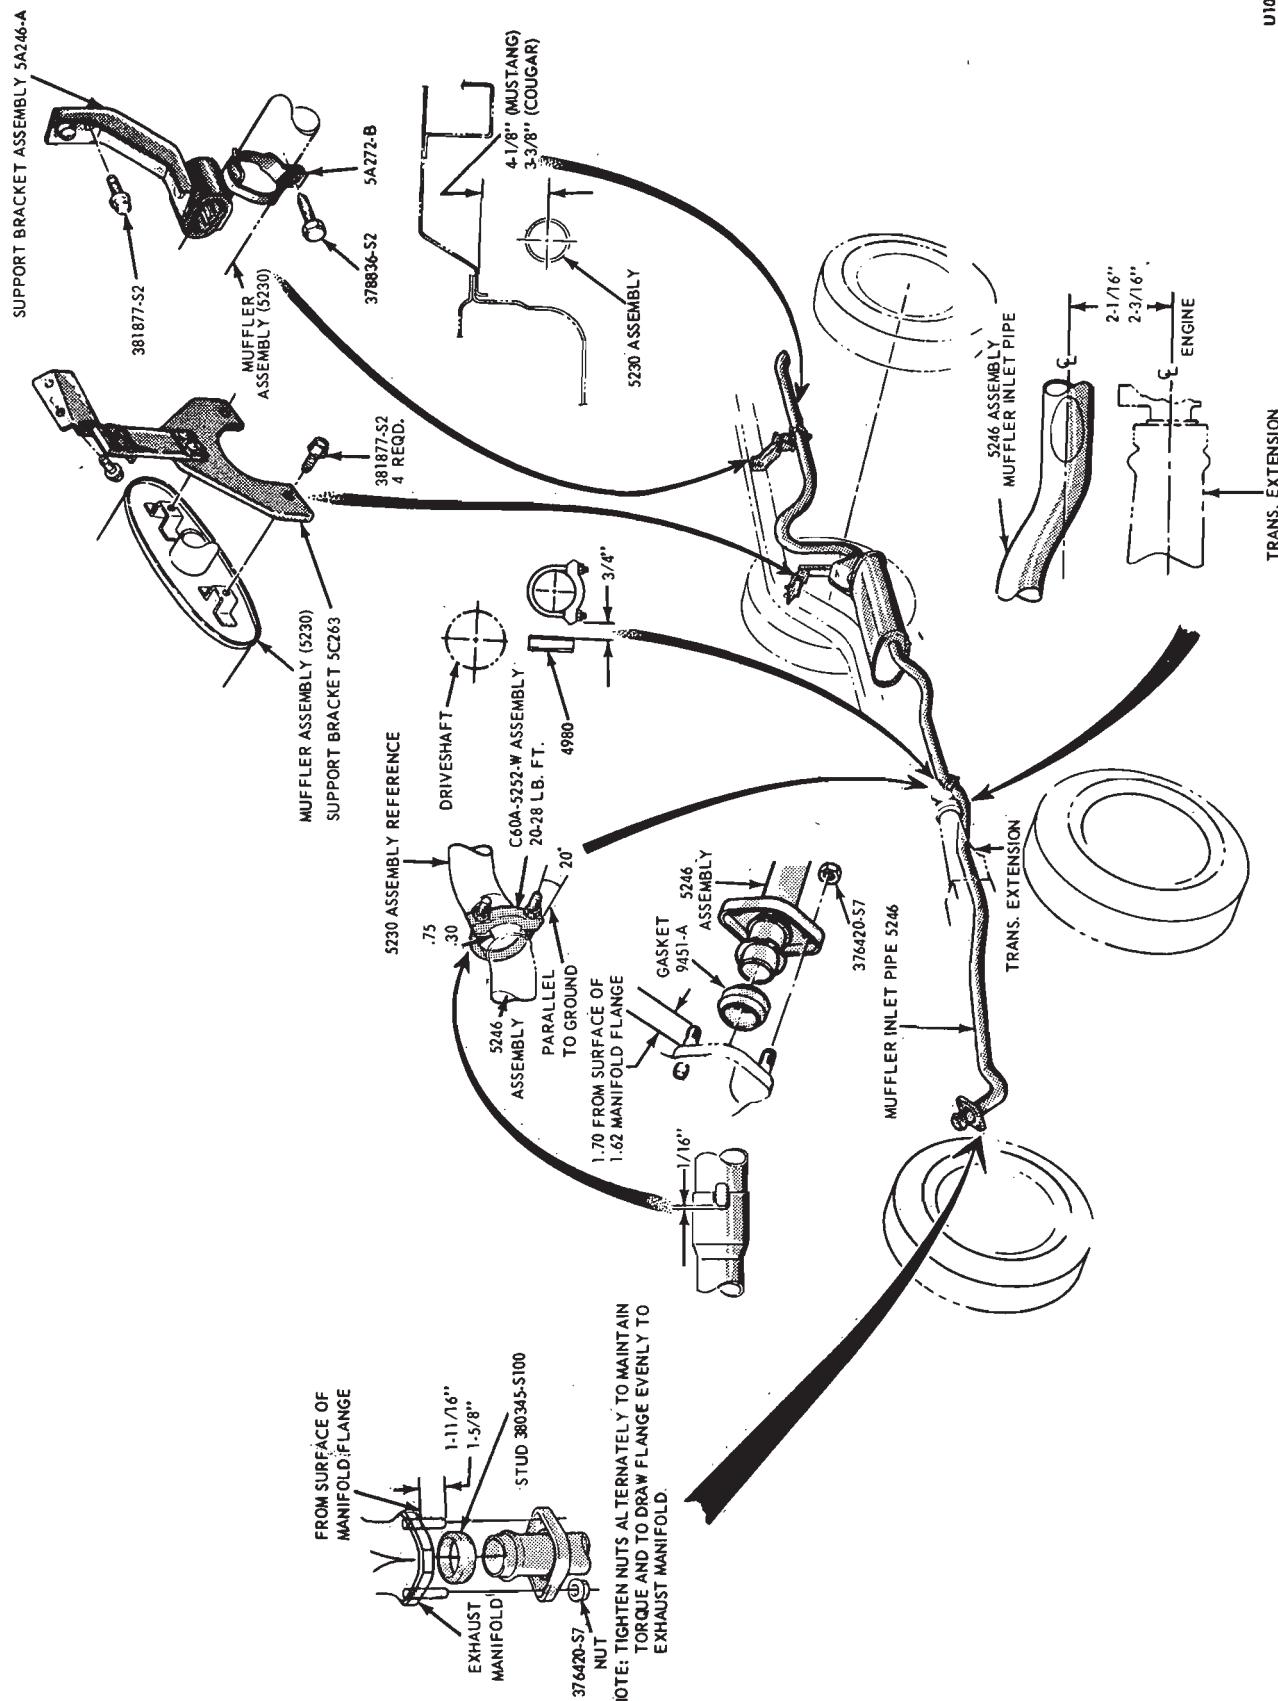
Cougar and Mustang Single Exhaust System—Six Cylinder
